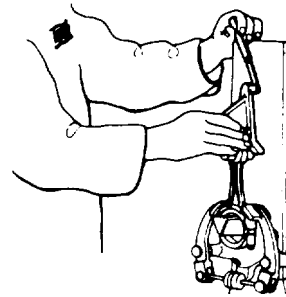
Measuring Parallel Alignment (Bending and Twisting) of Connecting Rod
